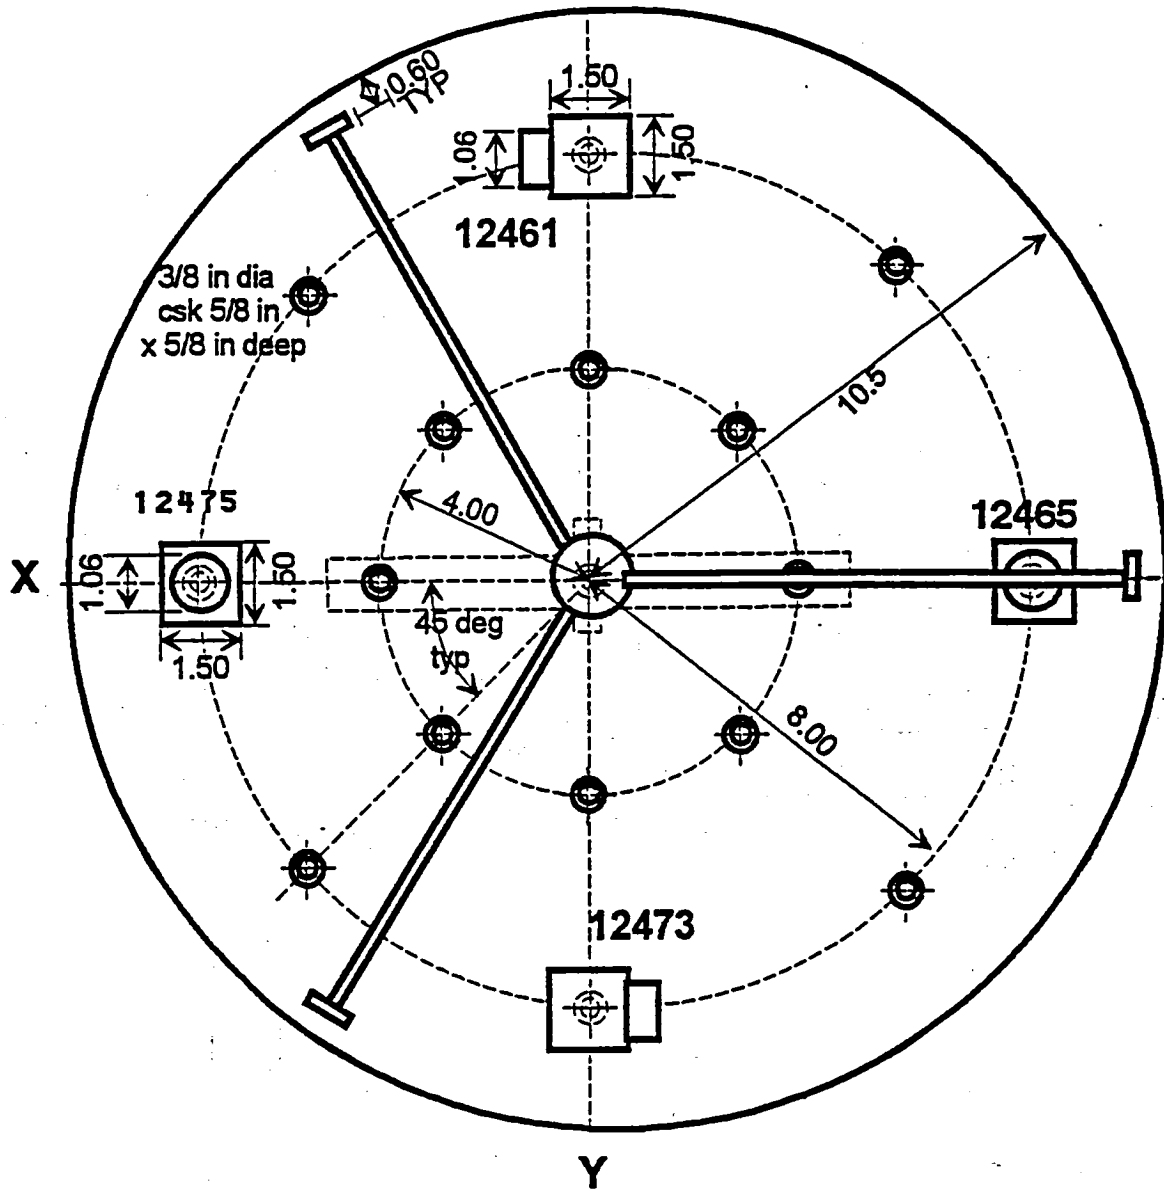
Detailed Drawing of Test Apparatus Platform with Accelerometers
